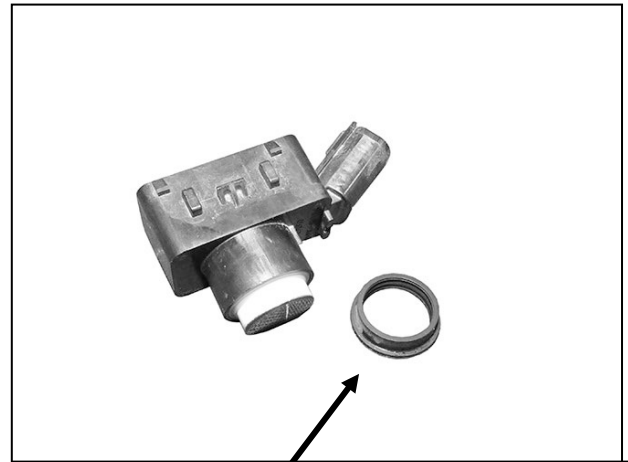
Unplug and remove all (4) parking sensors (arrows)
